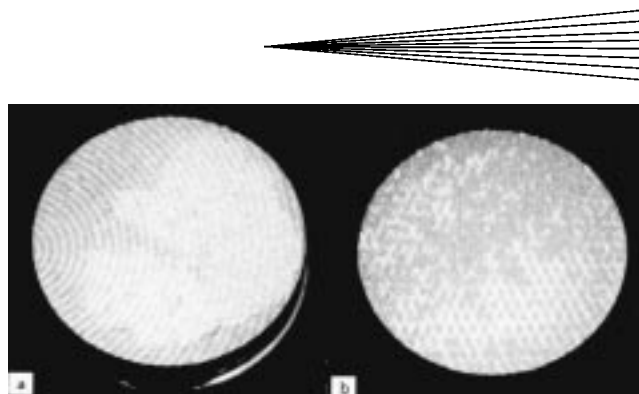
The substrate side of tensile test specimens after adhesive (partly cohesive) failure during the tensile test. The failure load was 6.9 MPa (a), spiral pattern) and 8 MPa (b), diamond pattern)
